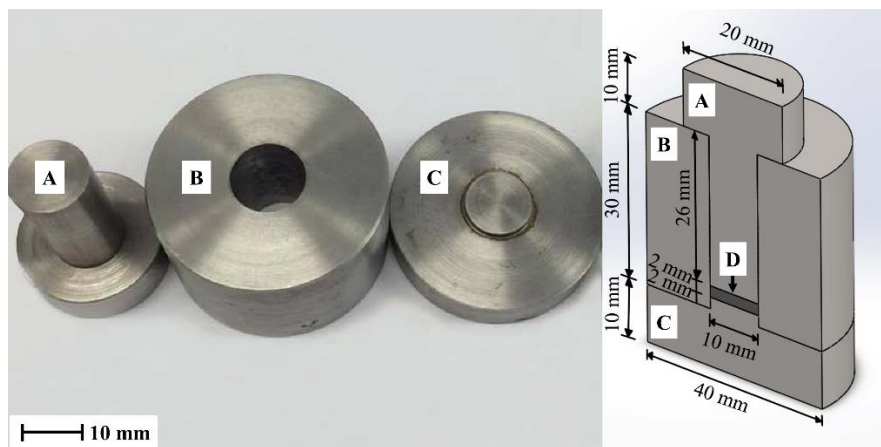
Image of the actual die parts are shown on the left. Cross sectional schematic of assembled die parts is shown on the right with forged specimen (D).
